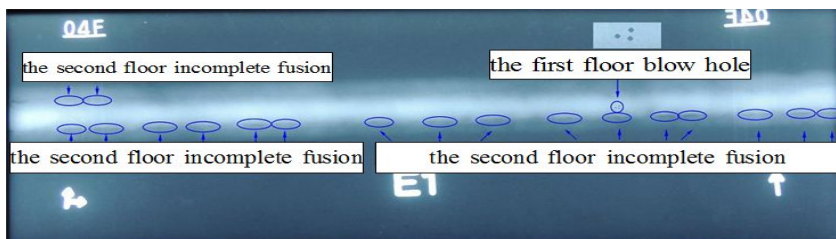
X-ray radiographic test film of shielding gas CO<sub>2</sub> 10% +Ar 90% welding specimen
